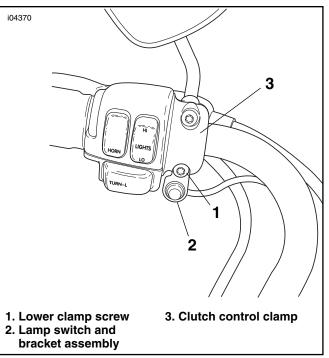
Install the Lamp Switch on the Clutch Control Clamp
